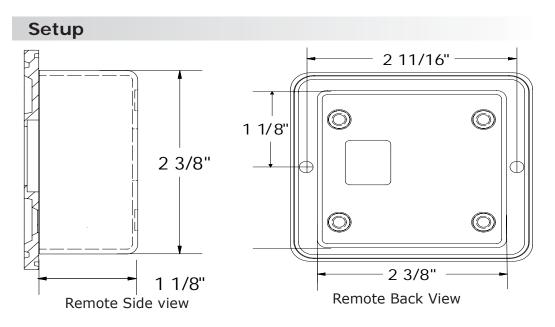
, Flush Mount Remote Cut-Out Dimensions
